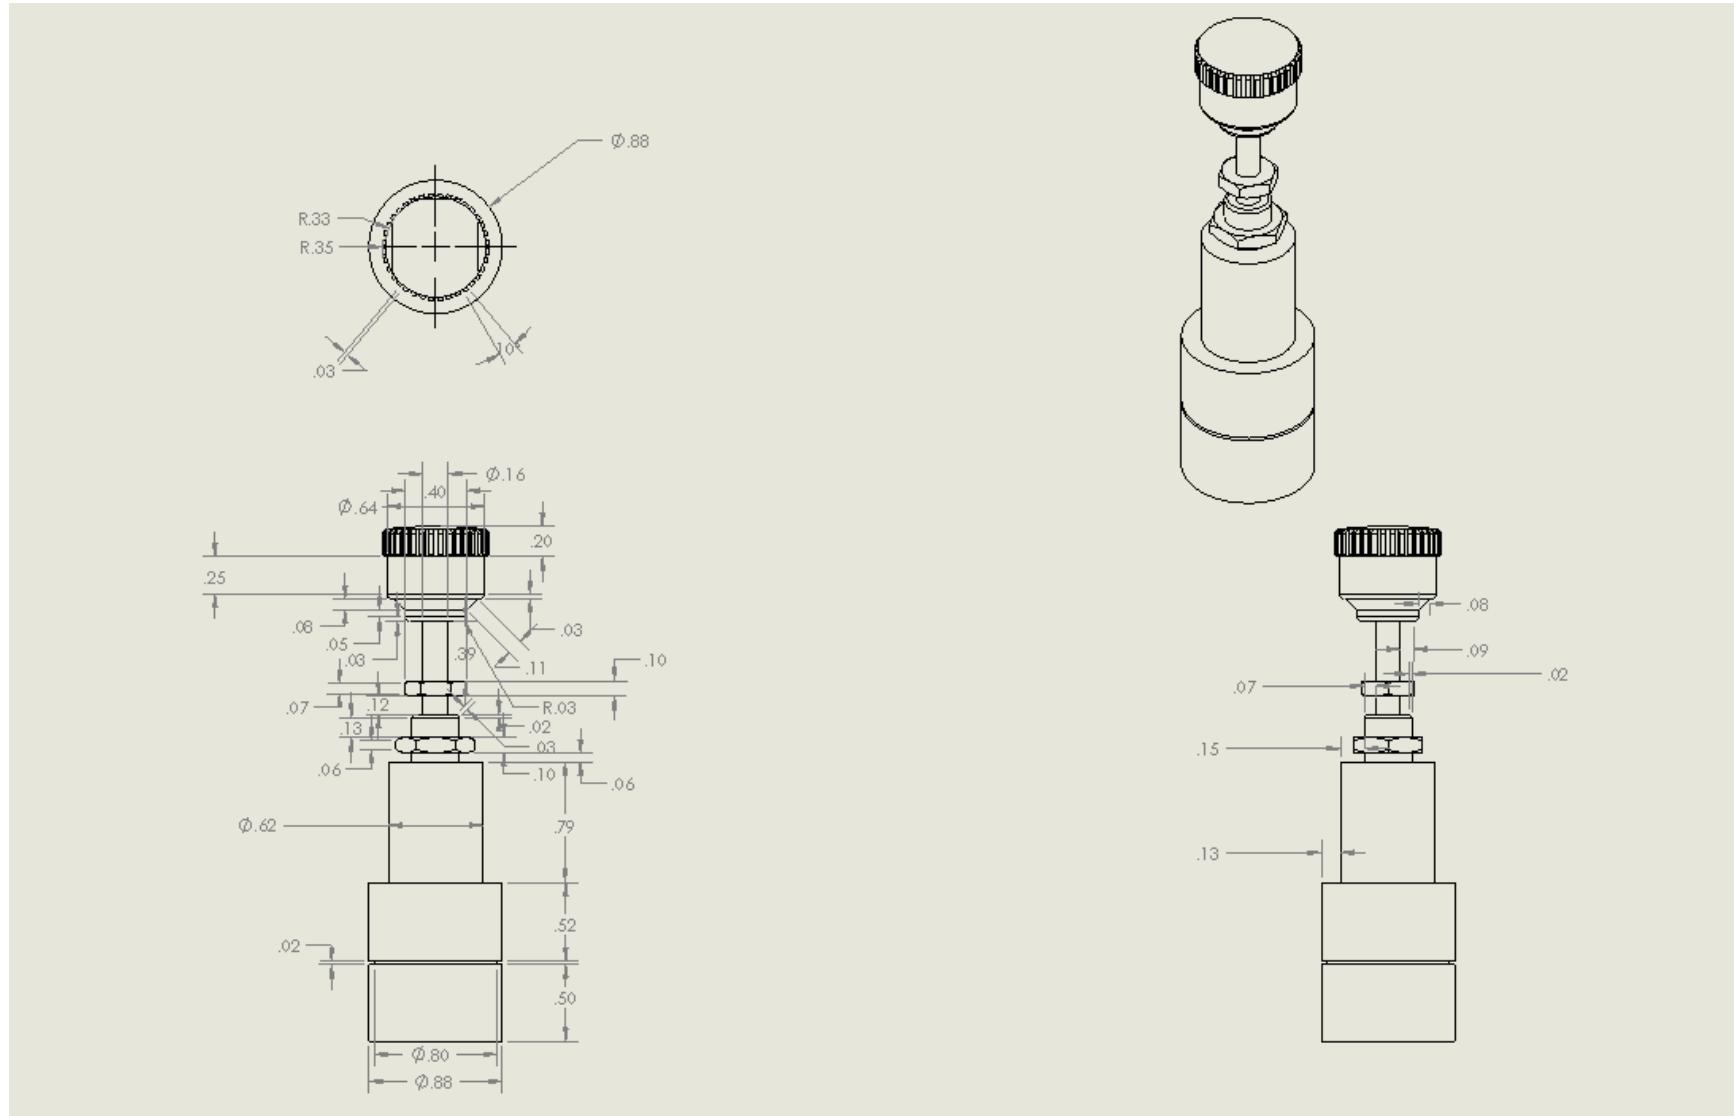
Part 1017 (Panel-Mount Compressed Air Regulator) Part Drawing
